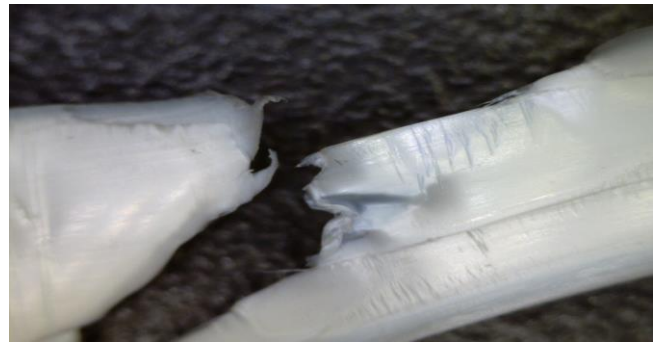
Image of the fractured Nylon 6-6 that underwent tensile loading [2].
